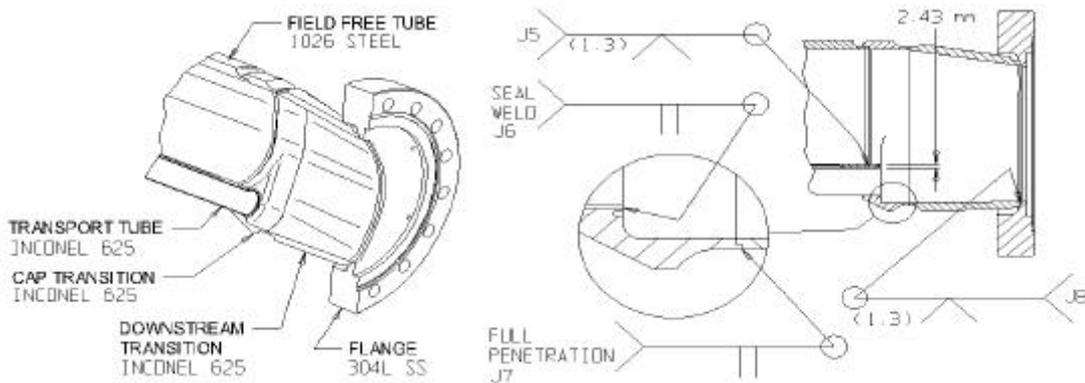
Cutaway views of the new modified storage ring injection septum.
